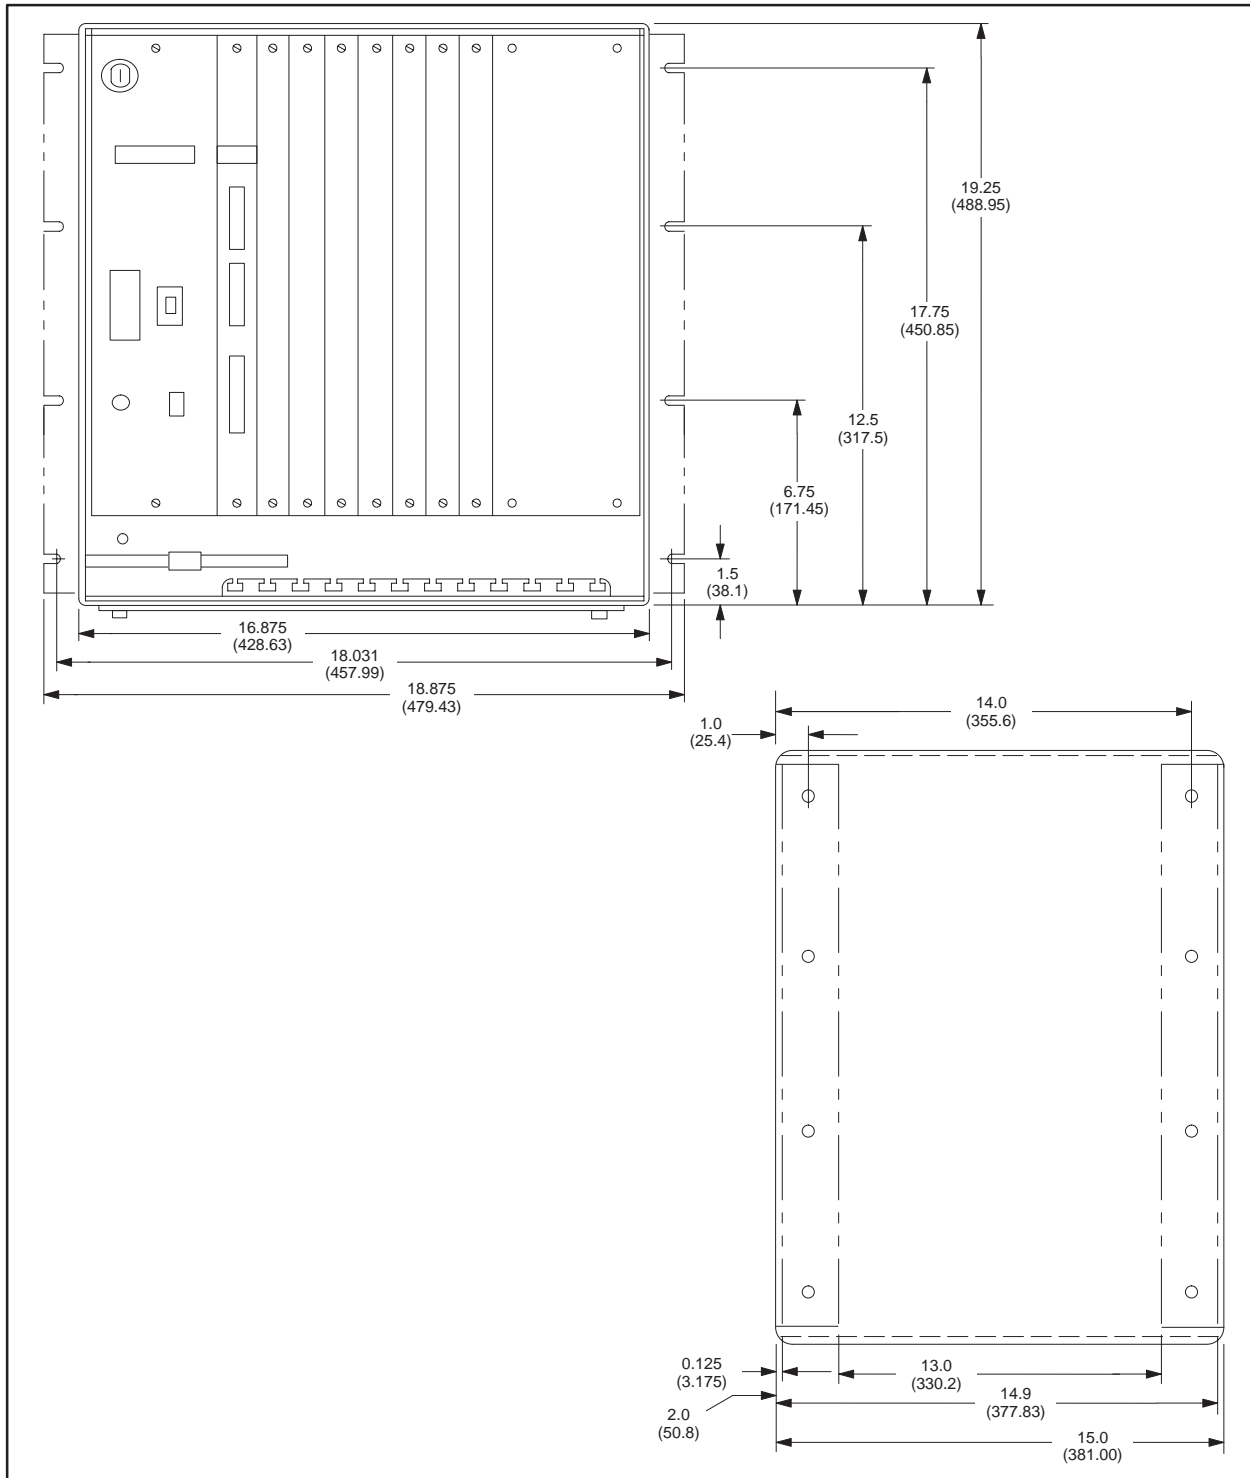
Mounting Dimensions for TI560T/TI565T
